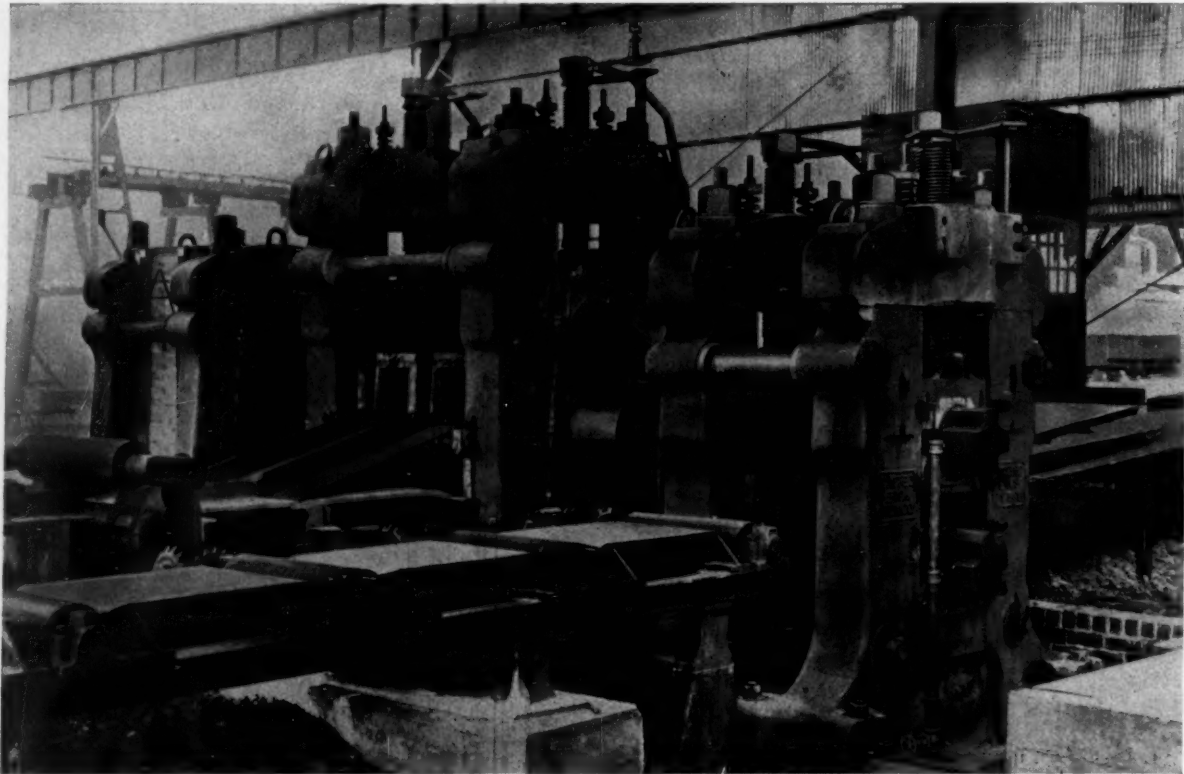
THE 24-INCH SHEET BAR MILL IN THE PLANT OF THE ANDREWS STEEL CO., NEWPORT, KY.
